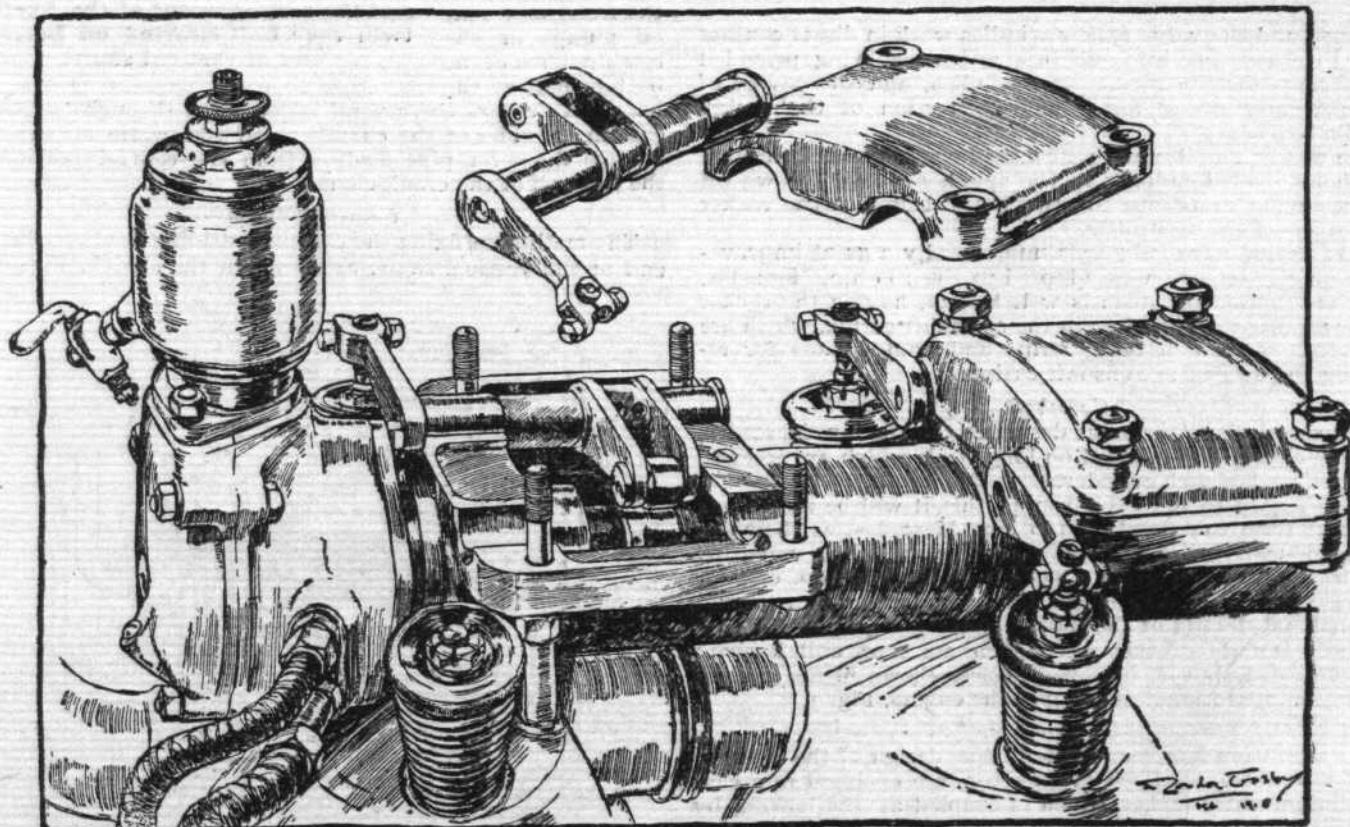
The overhead camshaft and new valve gear, showing detachable valve rockers and new design of air pump.
